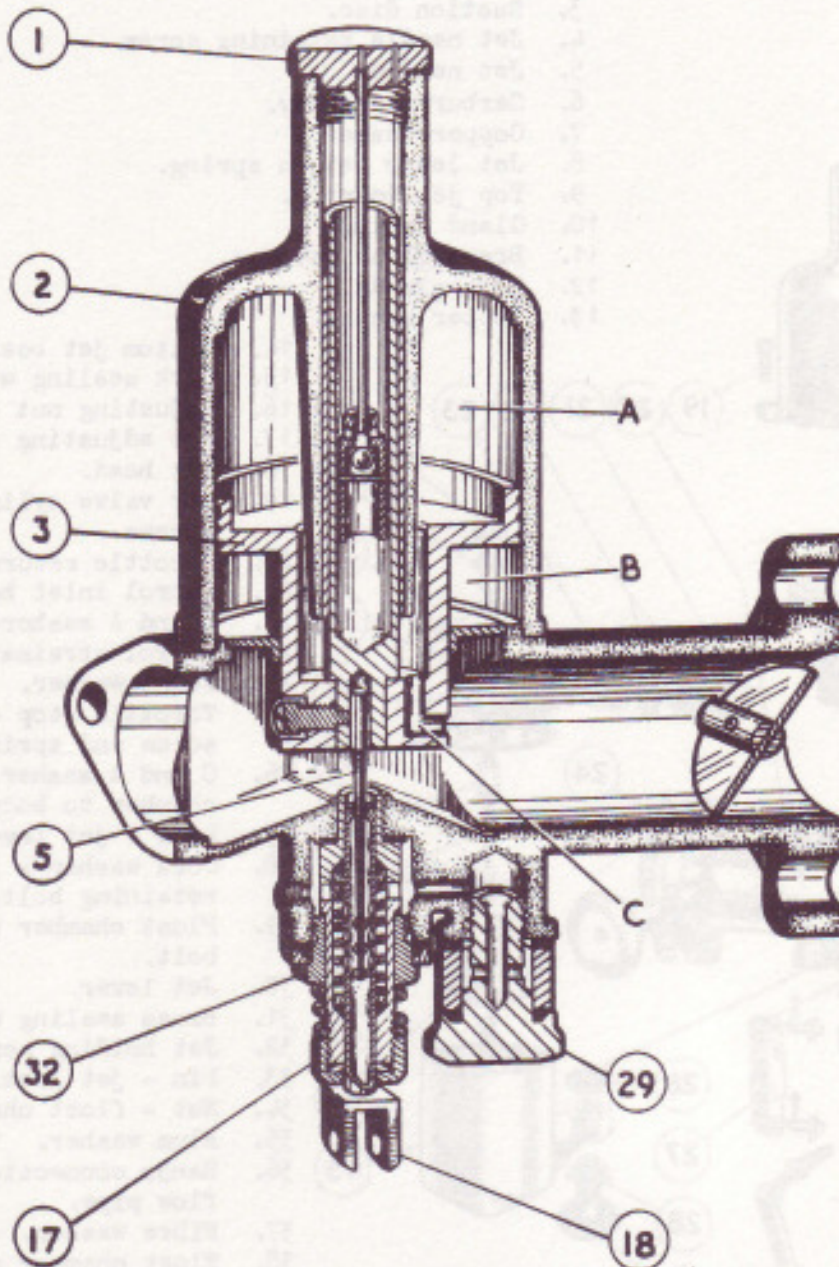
SECTIONAL VIEW OF CARBURETOR.
